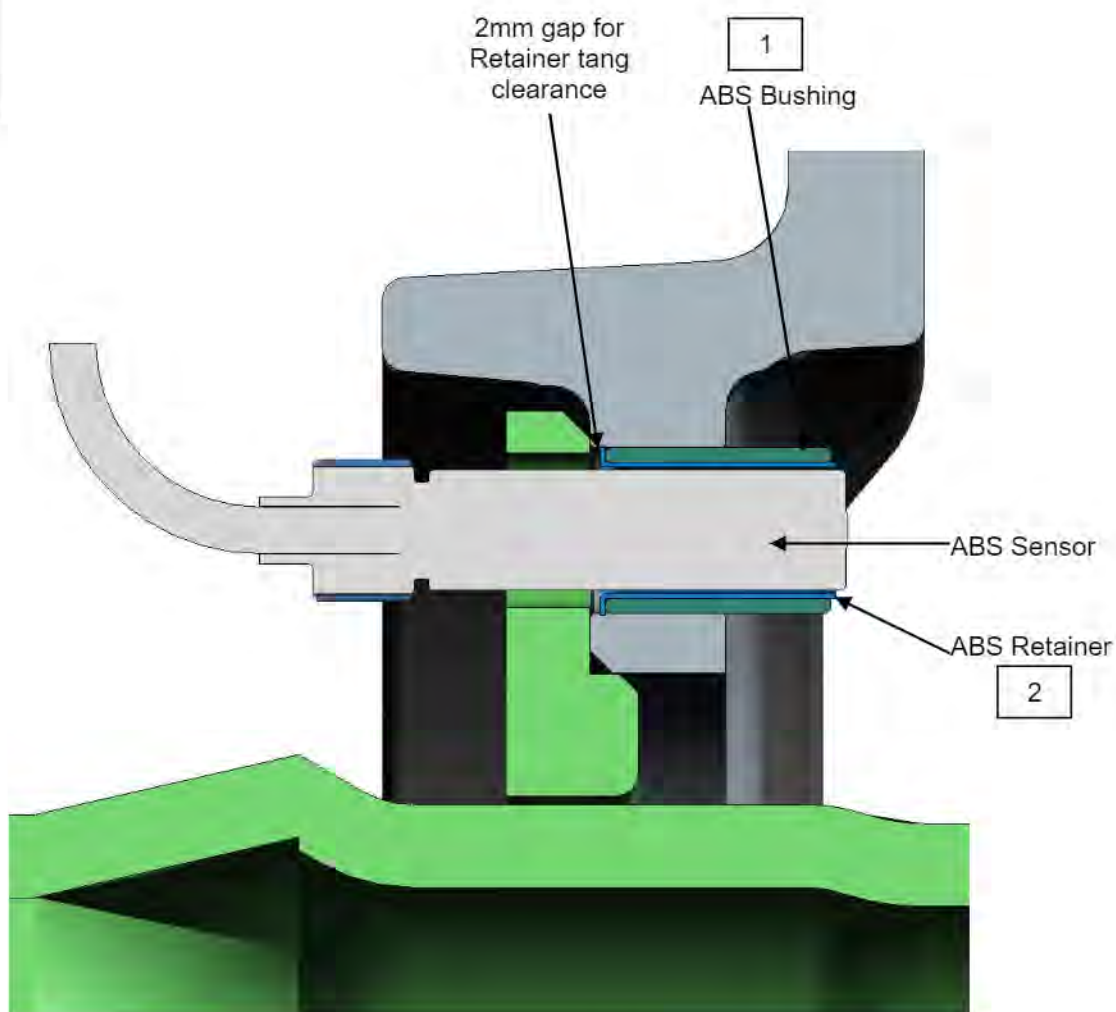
Section View of the ABS Sensor, ABS Bushing and ABS Retainer
